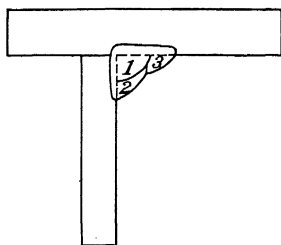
Overhead fillet weld. 1, 2, and 3 indicate the order of the deposits.
